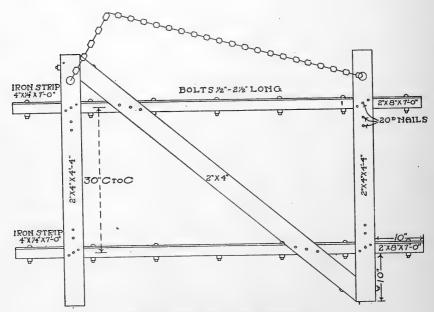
Road Drag (Detail Drawing). (Courtesy North Carolina Geological Survey.)
